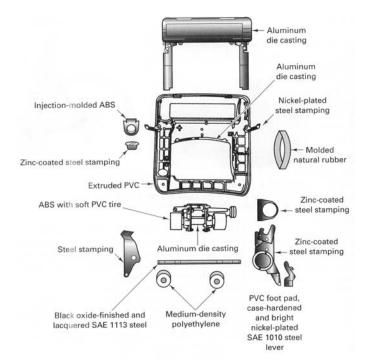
Materials used in various parts of a vacuum cleaner assembly
